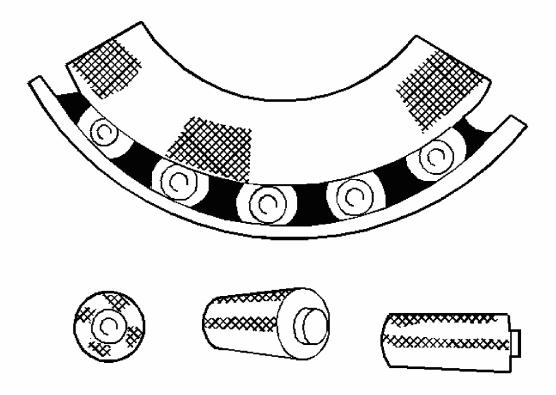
Identifying Abrasive Step Wear Courtesy of GENERAL MOTORS CORP.
